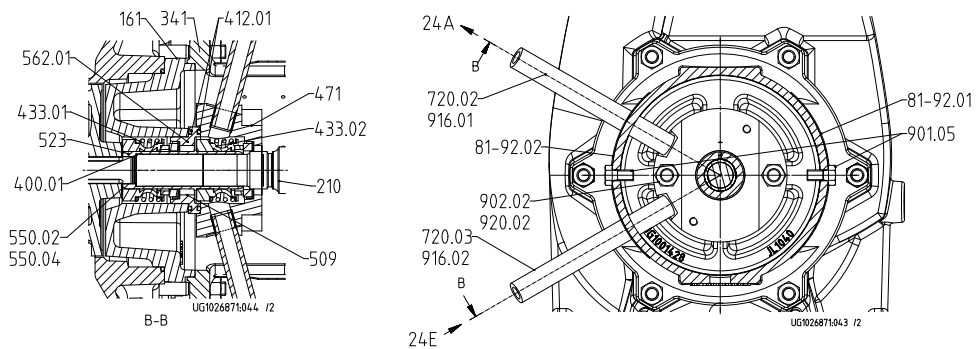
Mechanical seals in tandem arrangement, shaft unit 25/35
